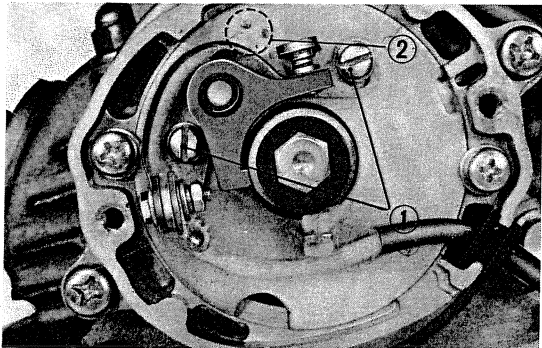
① Breaker arm retaining screws ② Adjusting position
